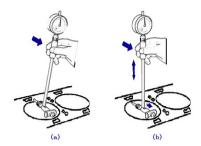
Correct method of inserting inner diameter gauge into cylinder
